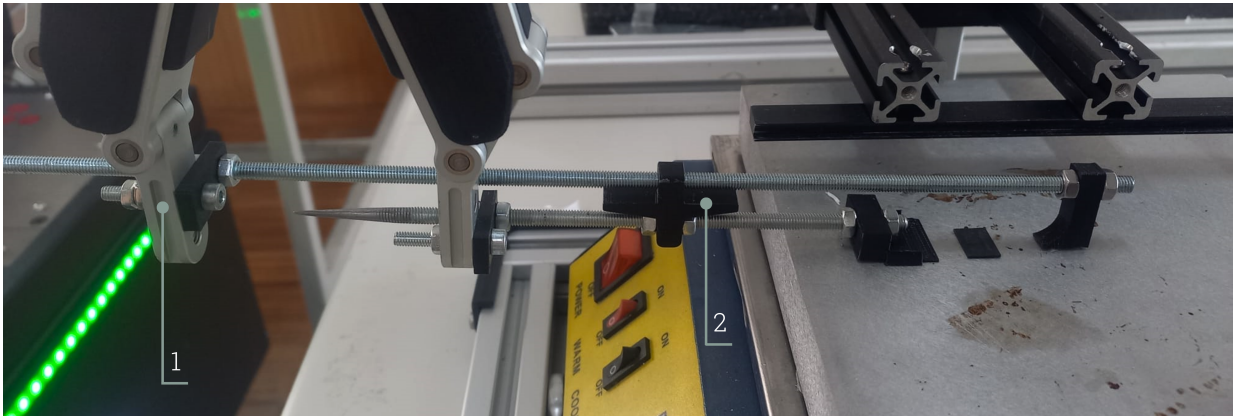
Prototype 1 of the tool fabricated to remove PCB's components. (1) gripper, and (2) tool.
